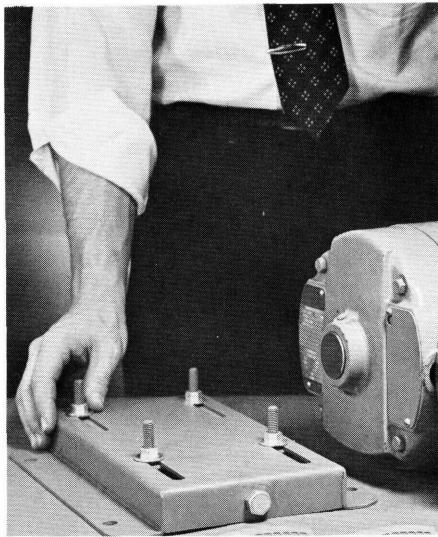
A slotted motor base provides a convenient method for aligning the motor with the load and for adjusting the belt tension.
